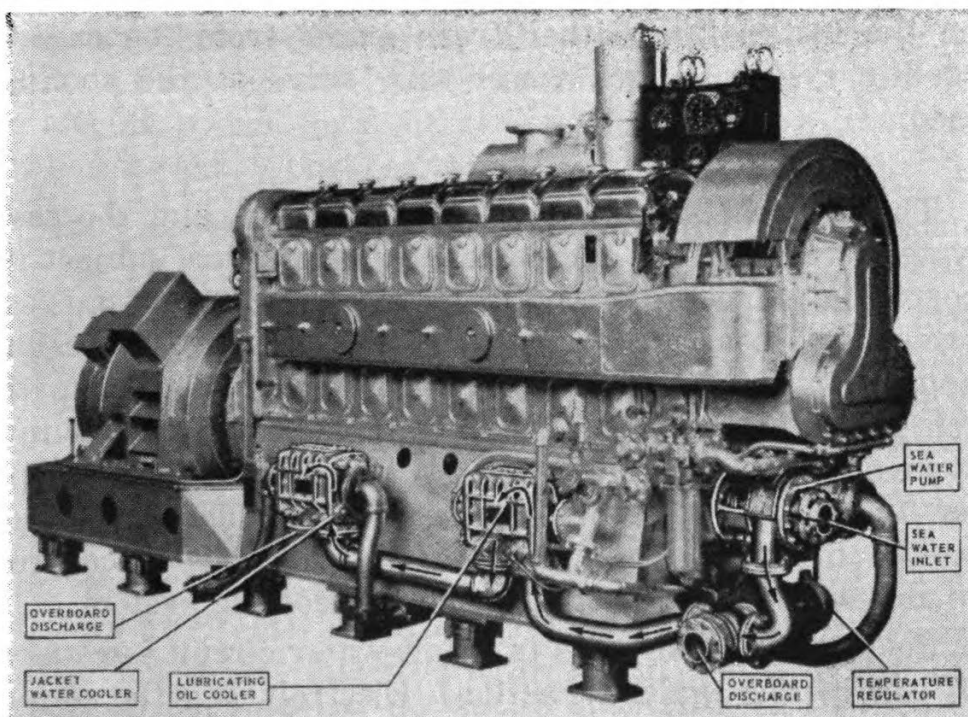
Location of coolers and other cooling-system components of GM 8-268A engines.
